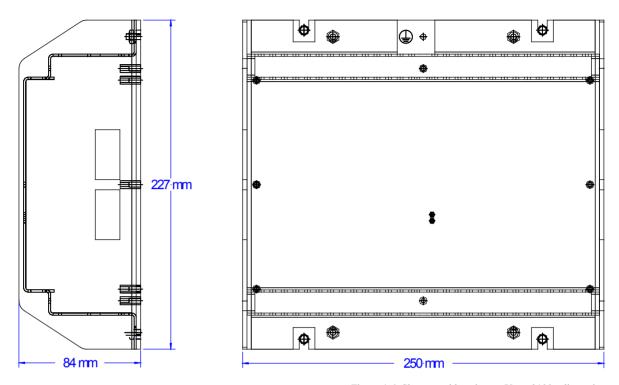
Sheet metal housing easYgen-3100 - dimensions
